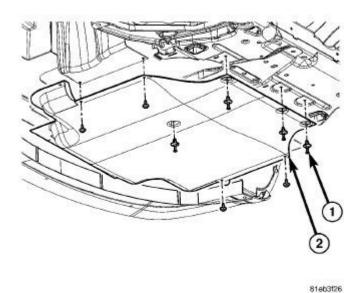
Belly Pan Courtesy of CHRYSLER LLC
